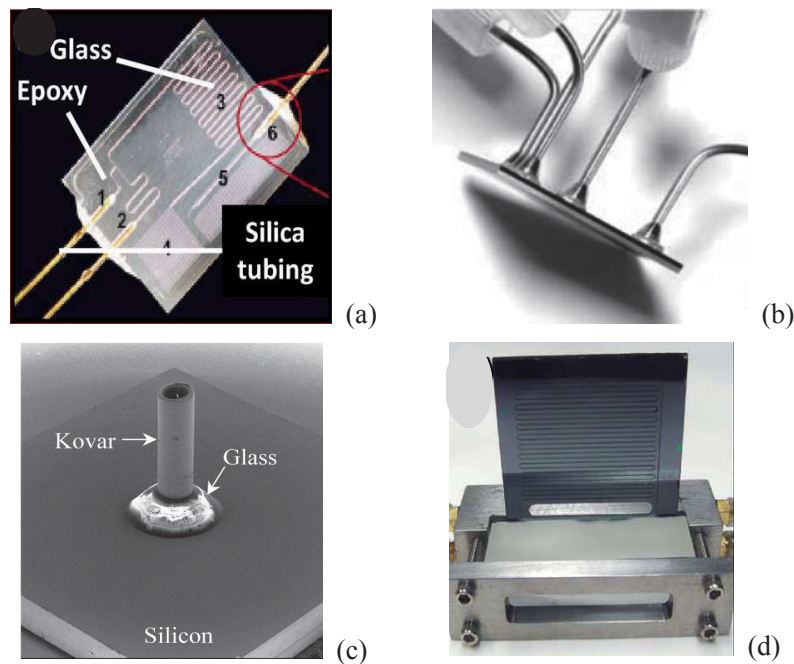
Examples of packaging techniques: (a) epoxy gluing [48], (b) metal soldering [49], (c) anodic bonding of Kovar tubes [50]; and (d) compression sealing [9].
